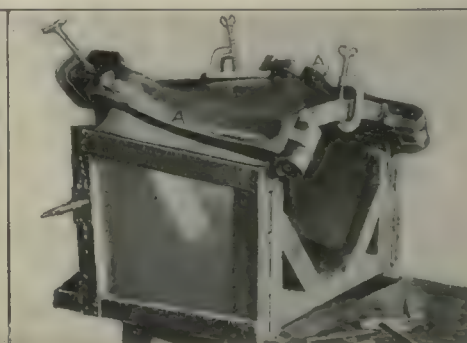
WELDING THE CORNERS OF THE DASH COWL
